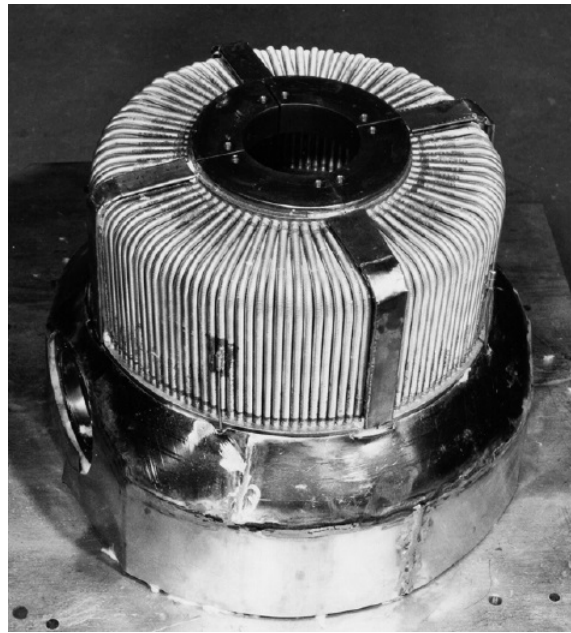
Photograph of a Stirling engine heater head showing the heater tubes [97]
